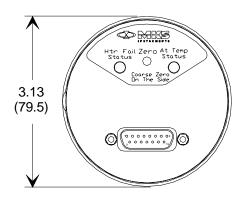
Top View Dimensions (shown with the optional heater status LEDs)
